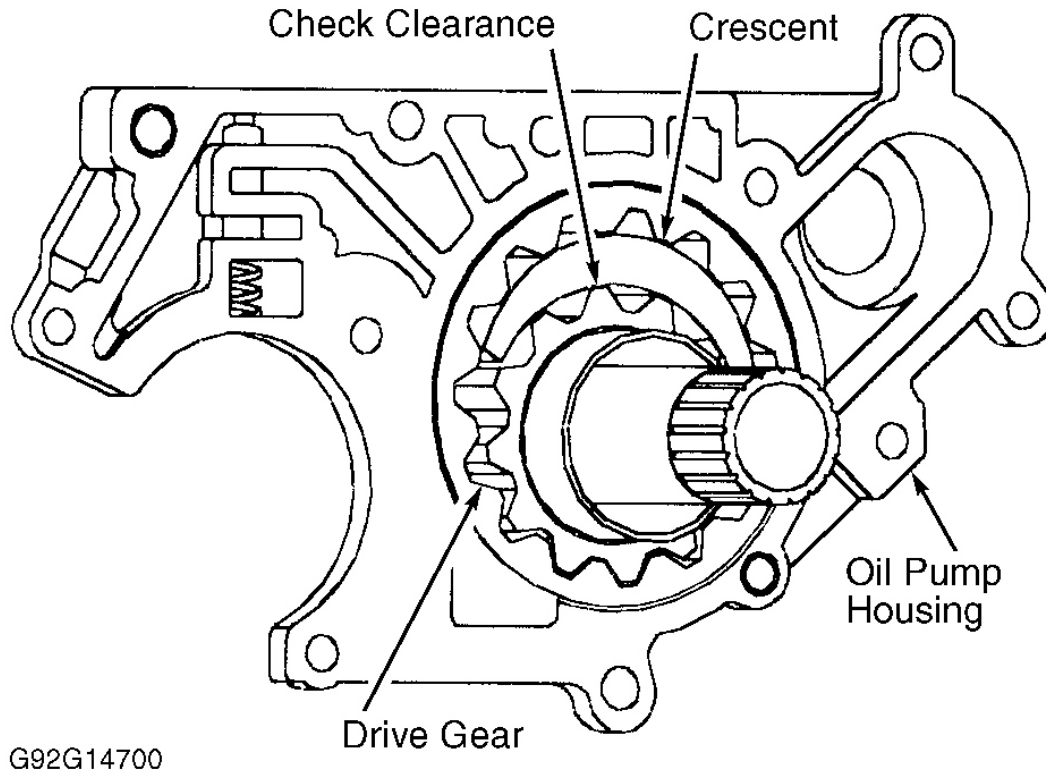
Checking Drive Gear-To-Crescent Clearance
